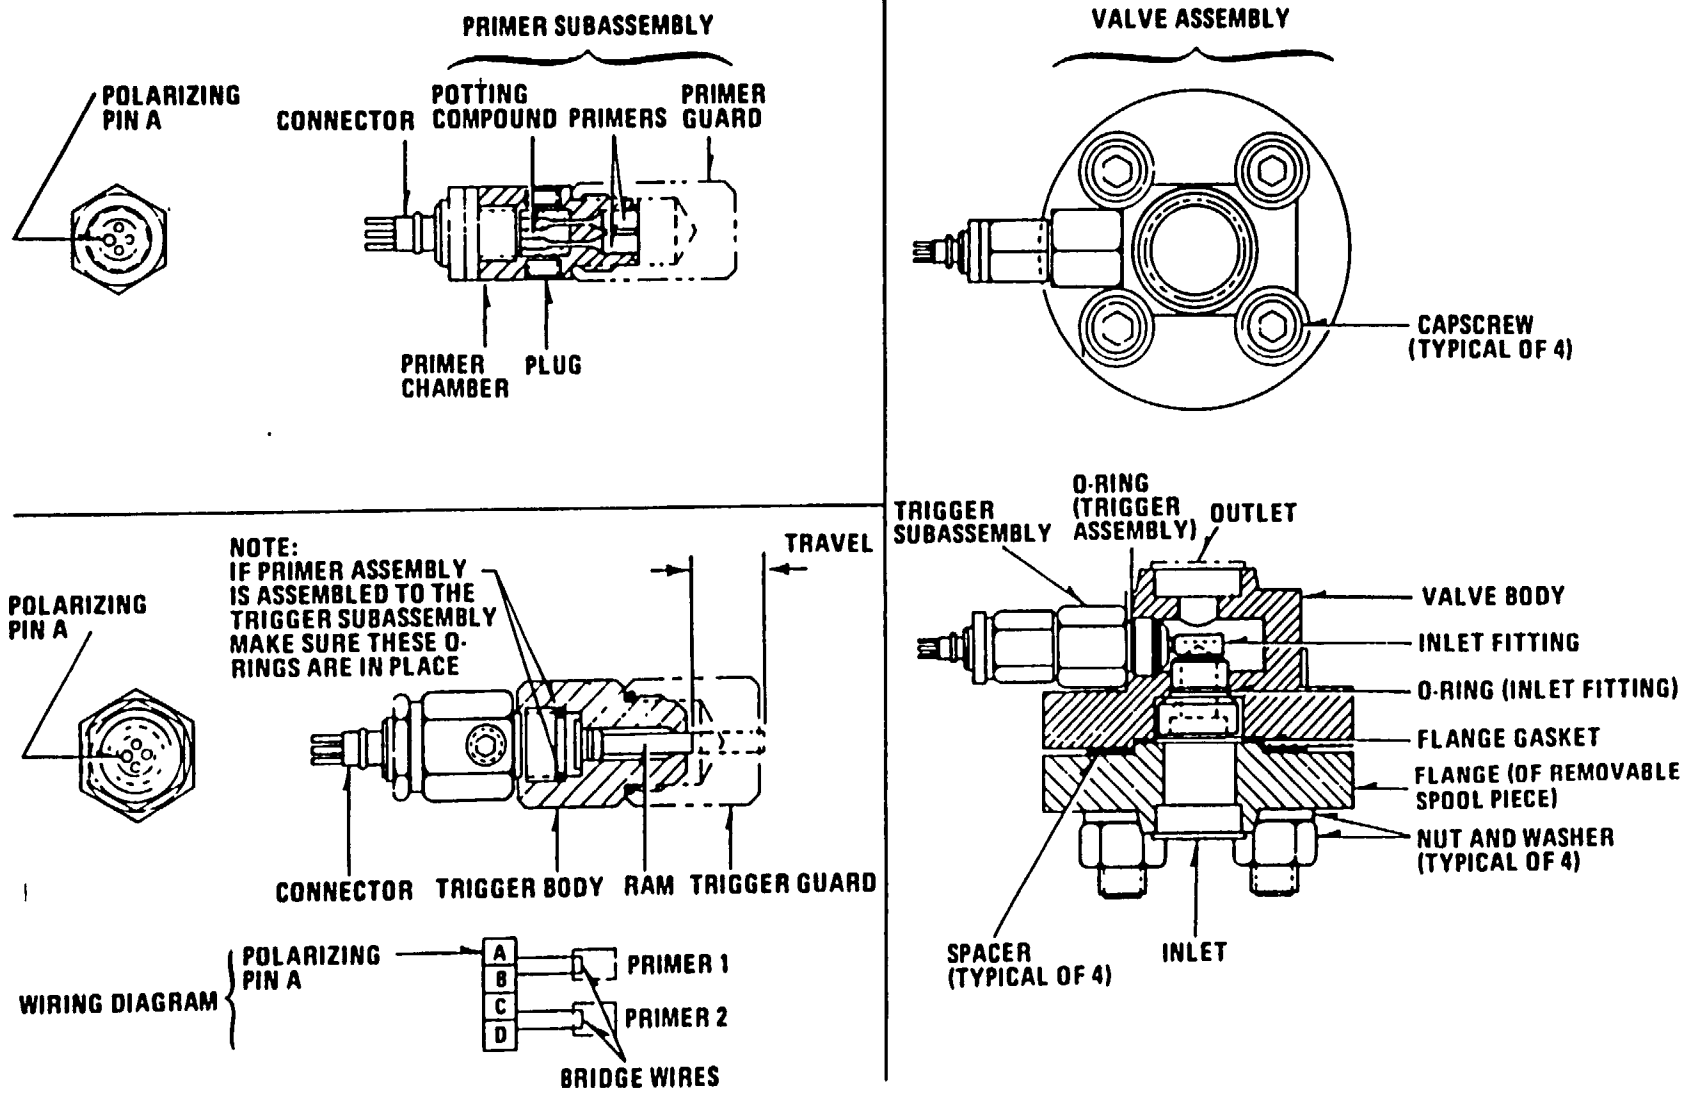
Explosive Valve (Cross-Sectional View)
